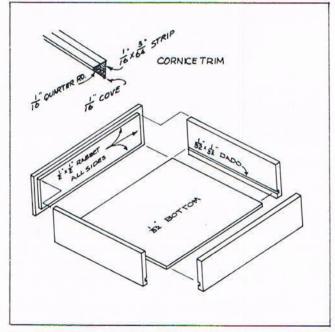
C - Welsh Dresser: Drawer and Cornice Trim Detail.
